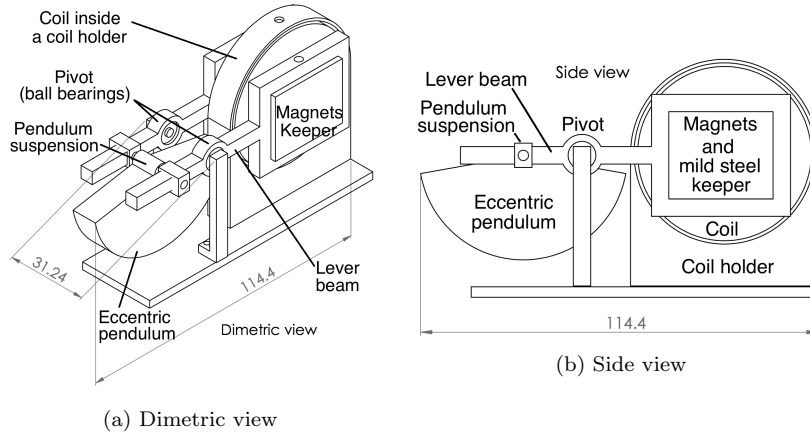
SolidWorks drawings of the pendulum-lever prototype, dubbed Corsair.
